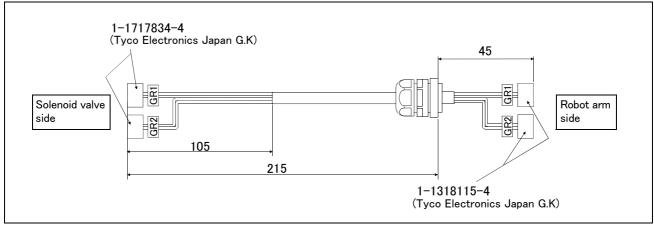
Outside dimensions of hand output junction cable (RH-6SDH series)
